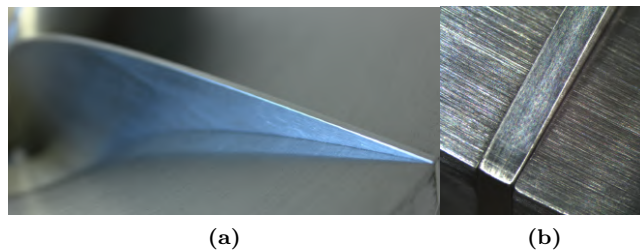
(a) Ridge clamped between horn quarter sections; (b) Zoom-in on horn-to-ridge contact for 2 mm thick planar ridge.
